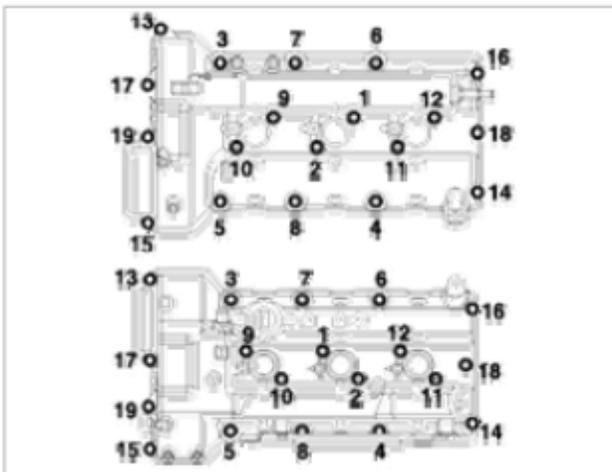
Identifying Cylinder Head Cover Bolts Tightening Sequence (LH And RH)
